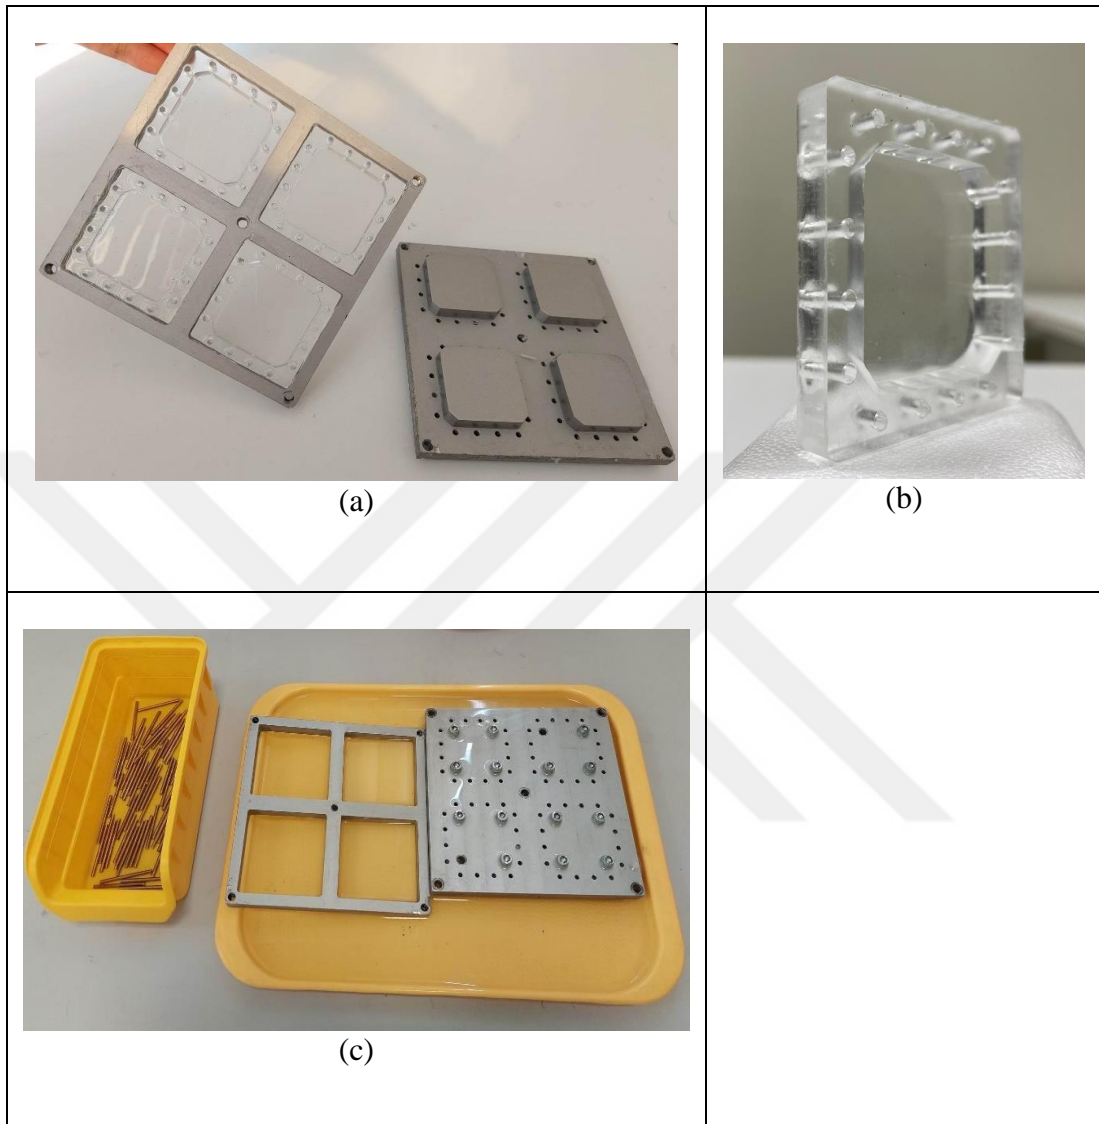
(a) Membrane demolding (b) Fabricated PDMS membrane (c) Mold and pins submerged in acetone after demolding for cleaning.
